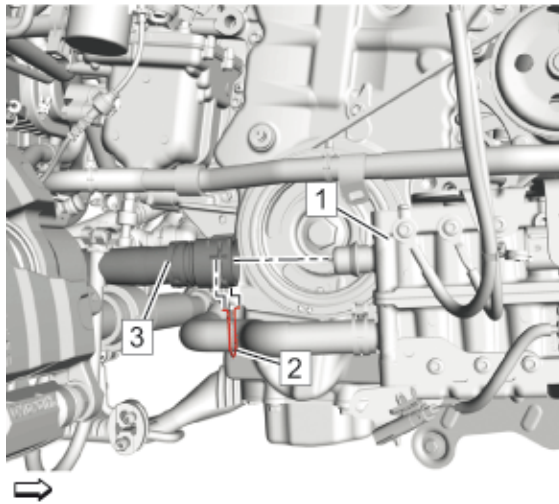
Heater Coolant Heater, Heater Inlet Hose And Quick Connect
